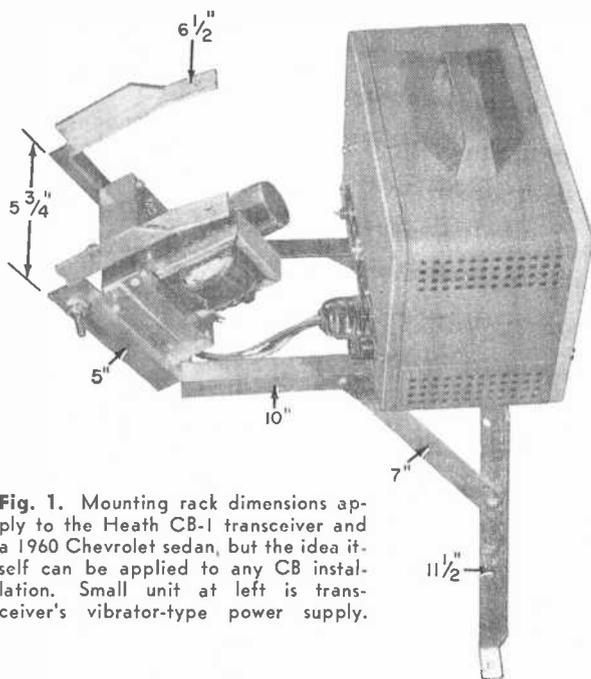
Mounting rack dimensions apply to the Heath CB-1 transceiver and a 1960 Chevrolet sedan, but the idea itself can be applied to any CB installation. Small unit at left is transceiver's vibrator-type power supply.
